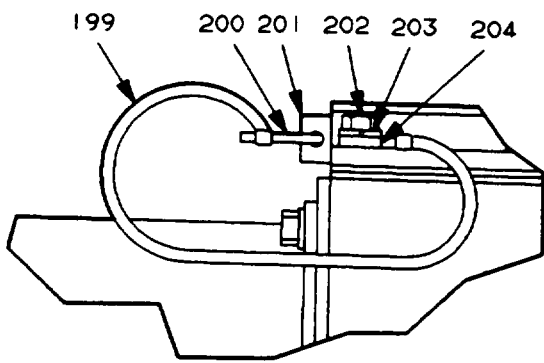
SHELTER ASSEMBLY (SHEET 15 OF 24)
